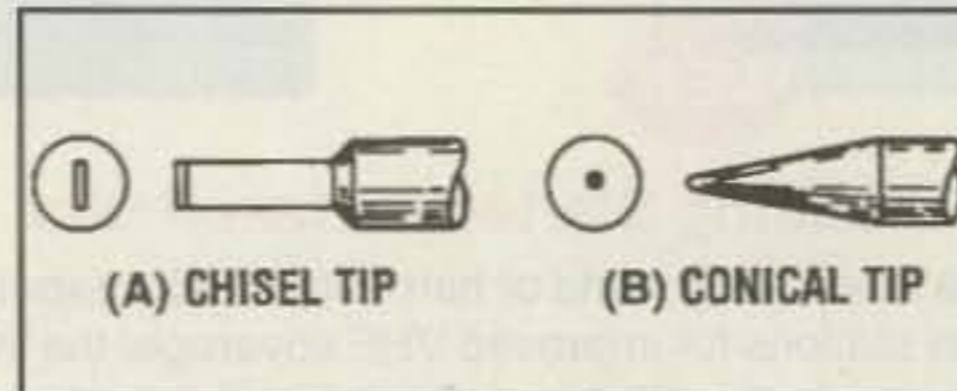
Copper tips for pencil types of soldering irons. A chisel tip is illustrated at (A) and a pointed conical tip at (B).
